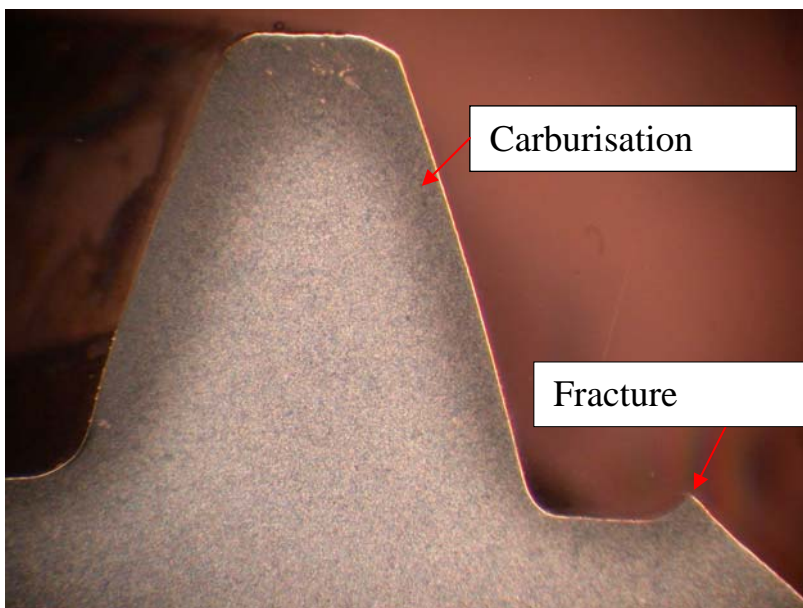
Photograph of the section grind following etching in Nital show that the gear has a carburisation layer.
